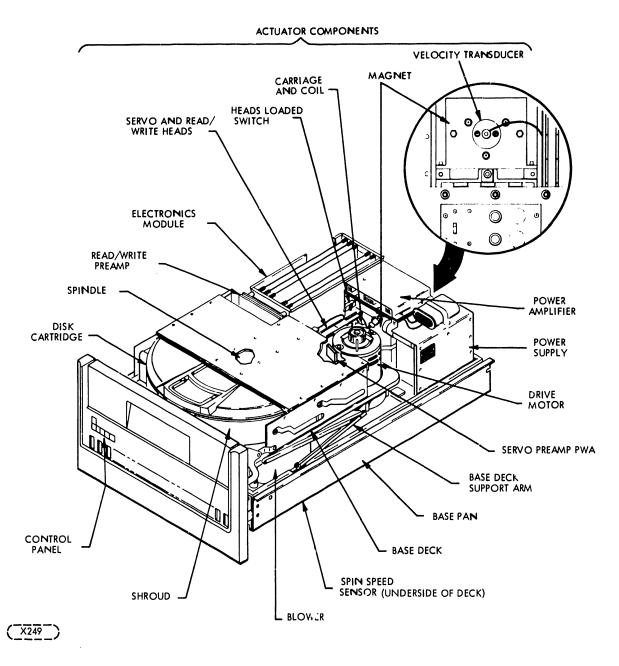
CMD MAJOR ASSEMBLIES
